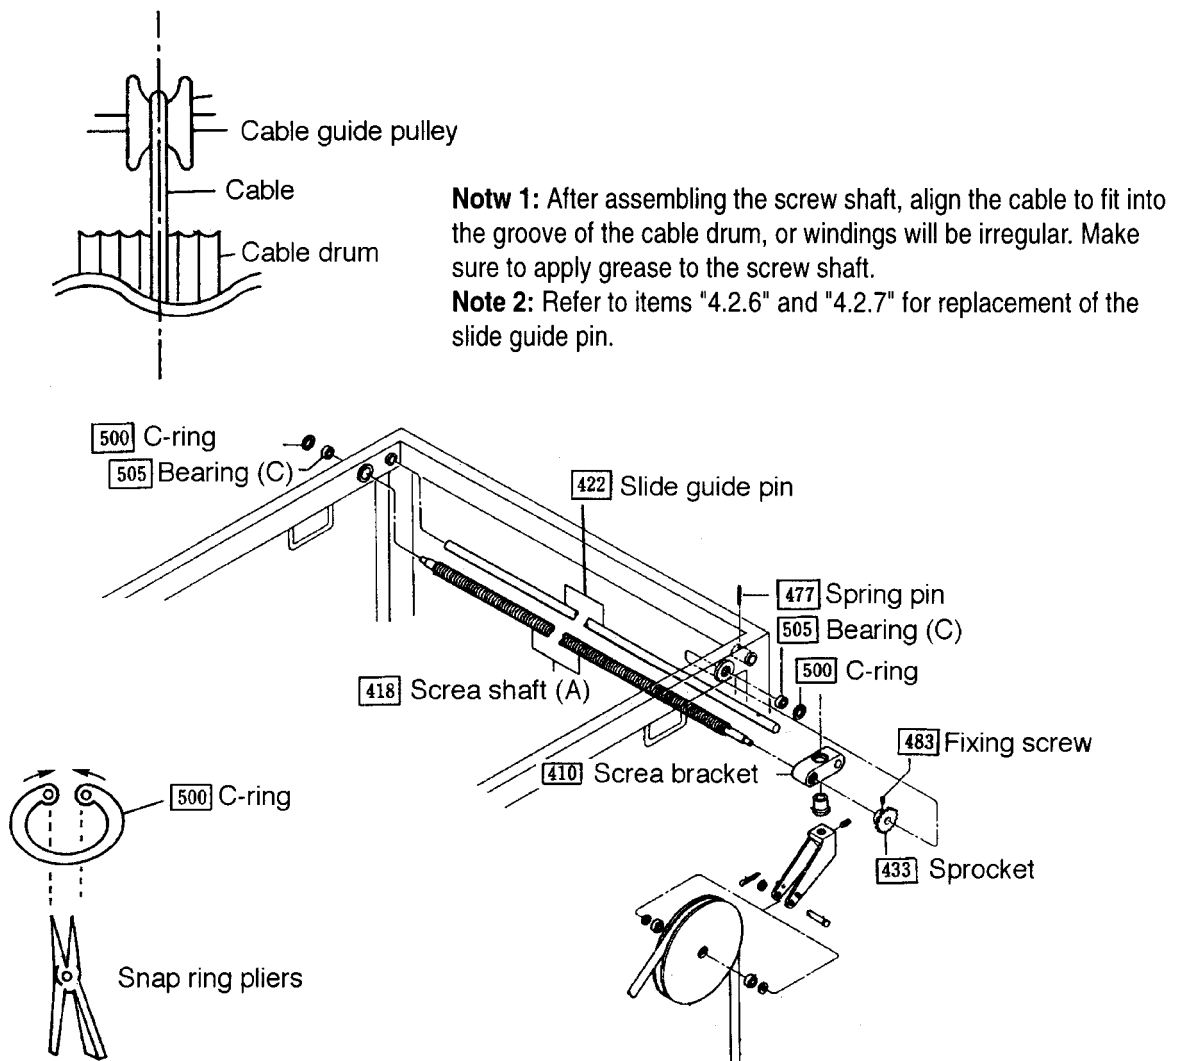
Replacement of the screw shaft (A) and slide guide pin
